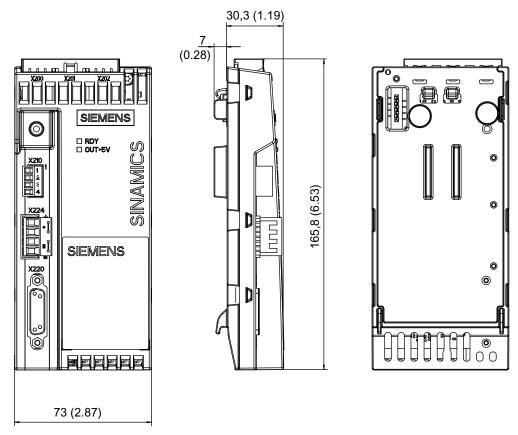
Dimension drawing of Control Unit Adapter CUA32, all data in mm and (inches)
